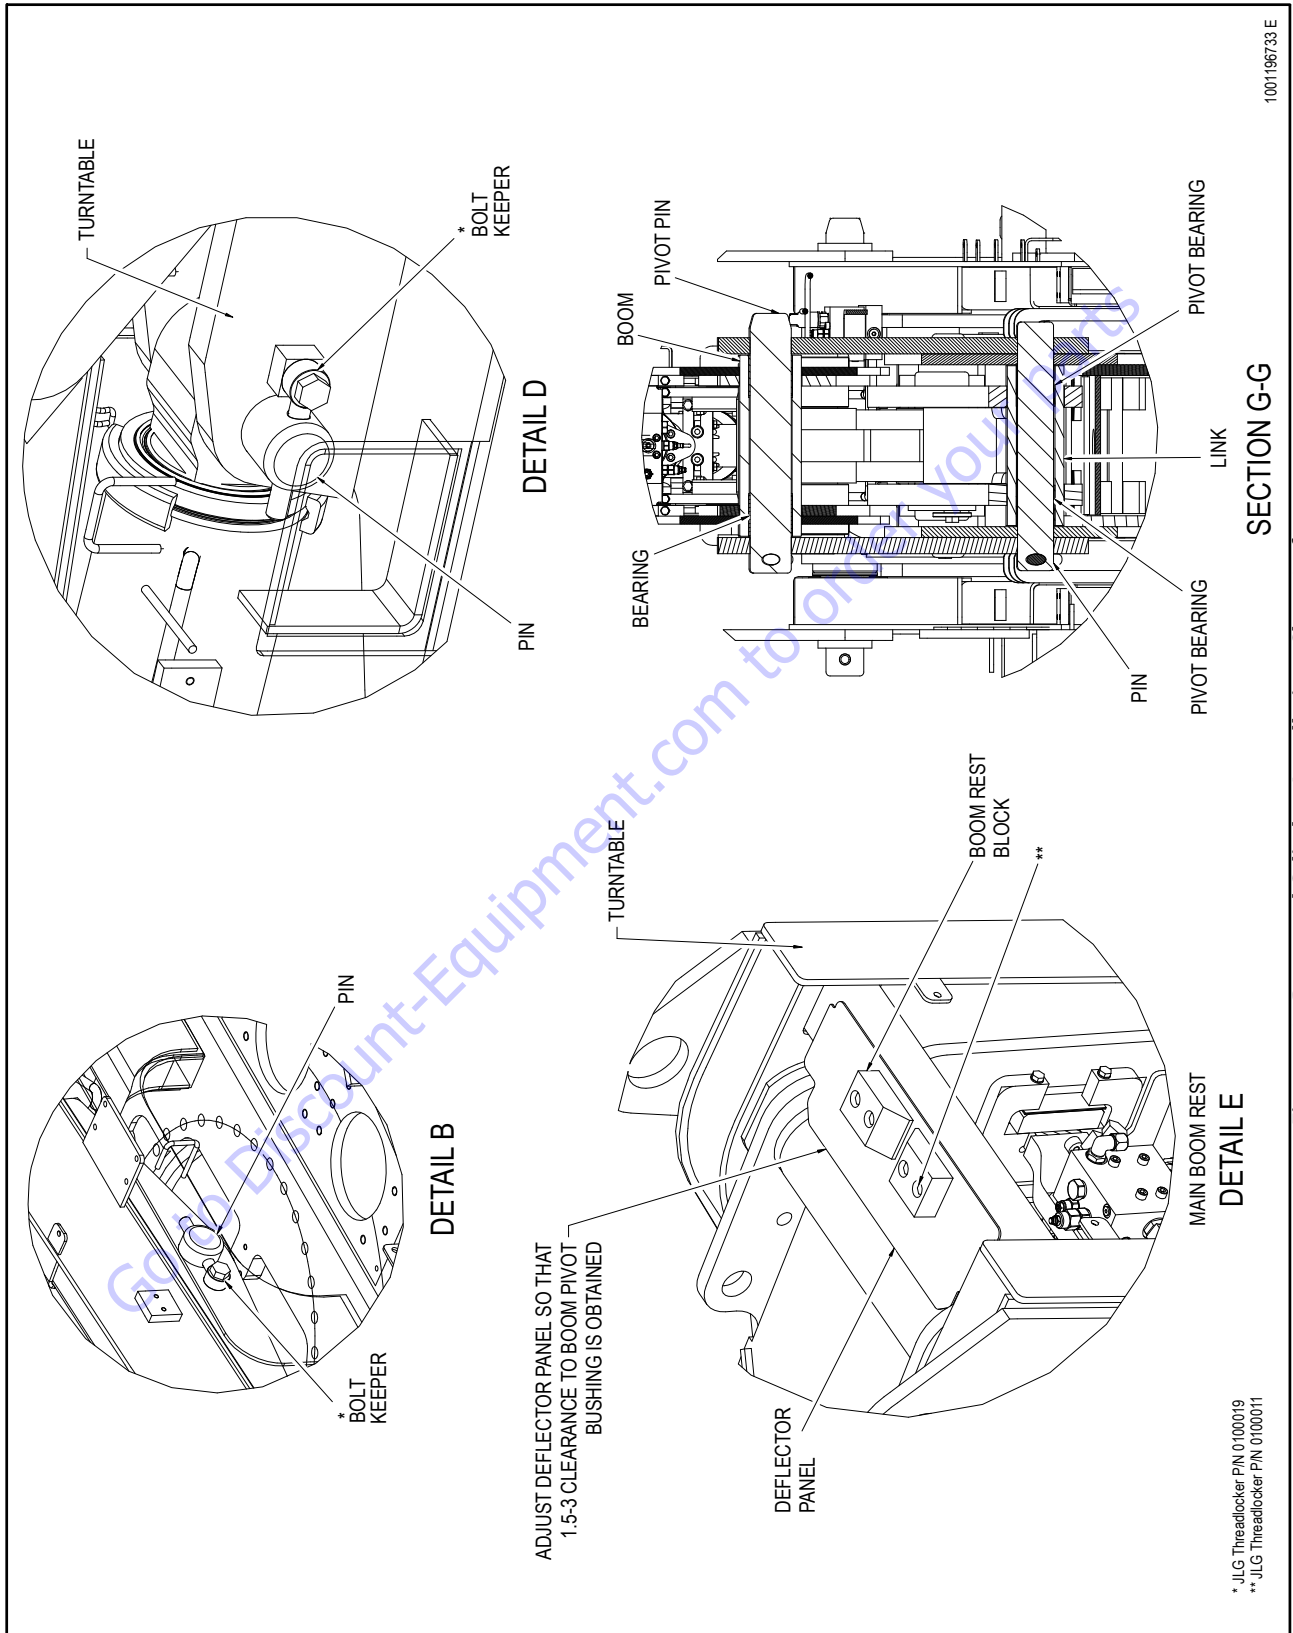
Boom and Cylinders Installation - Sheet 2 of 4
